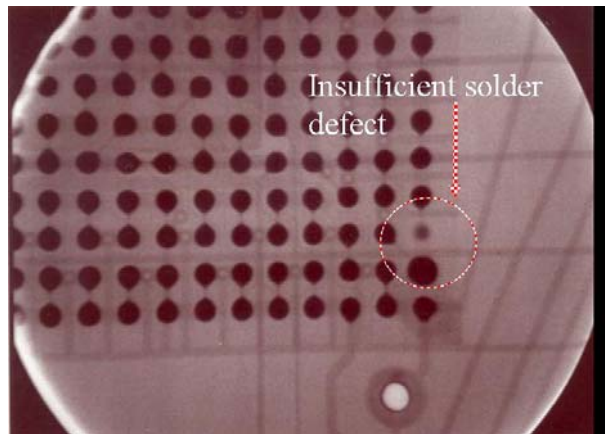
X-ray image of BGA solder balls showing insufficient solder site
